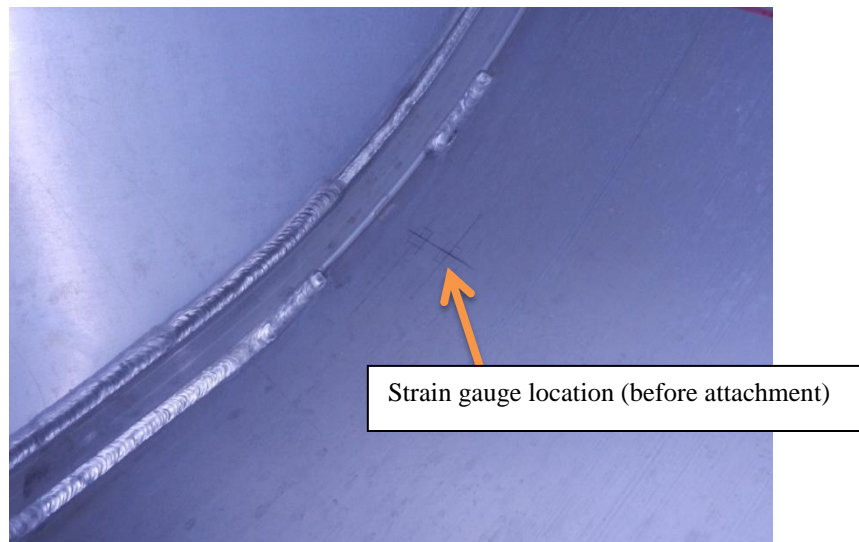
Fillet welds, GRW tanker J3910, Band B/8-
